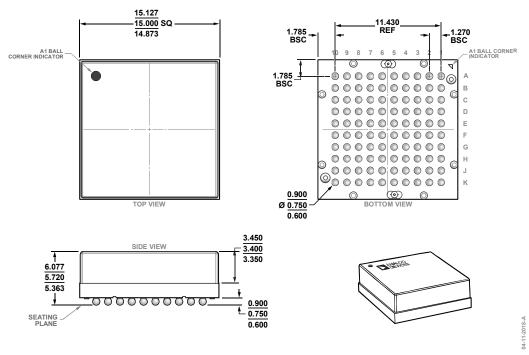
100-Ball Ball Grid Array Module [BGA] (ML-100-1) Dimensions shown in millimeters
